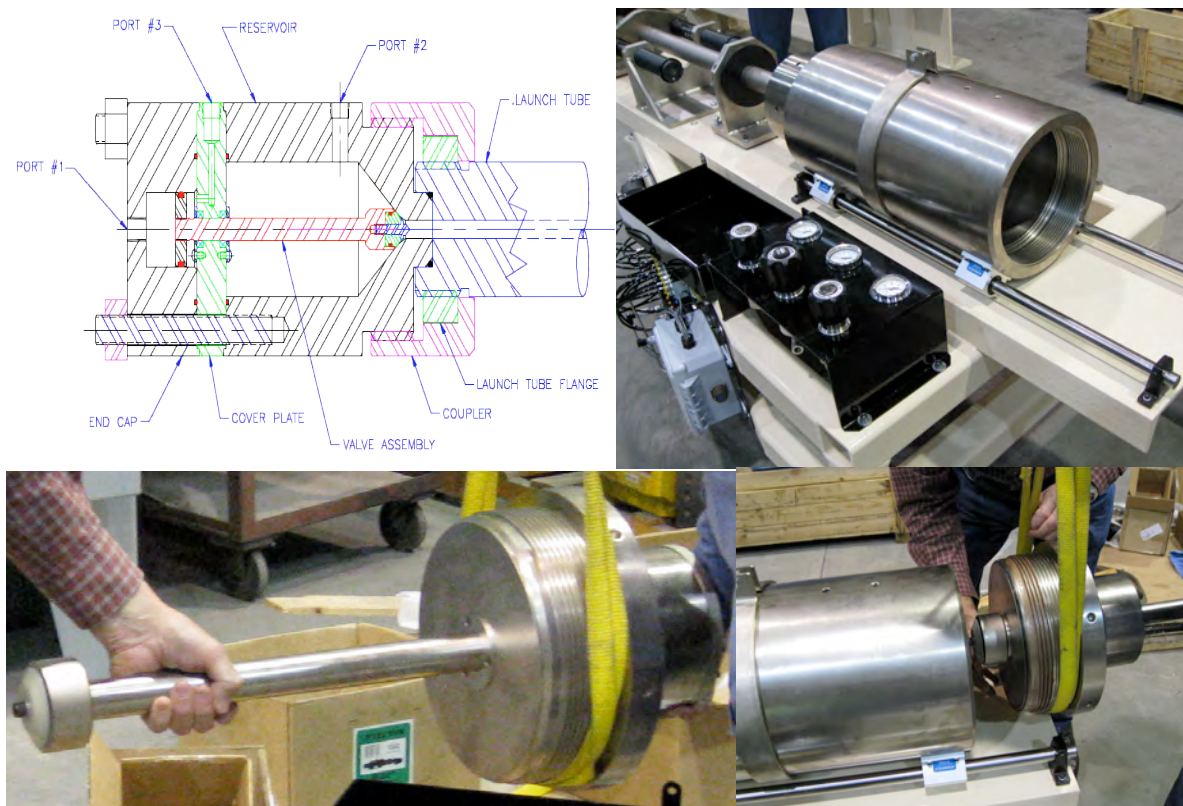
A schematic drawing (upper left) and photographs showing the breech assembly (upper right) and regenerative valve assembly (lower left) being inserted into the breech (lower right).
